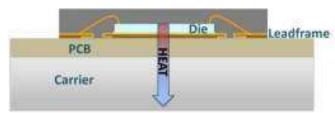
Cross-section view of co-planar part on PCB and carrier
